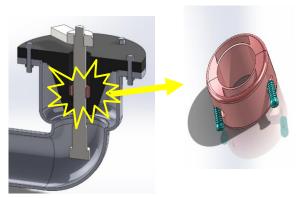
One of the Waste Valve Design with Customized Opening Regulator.
